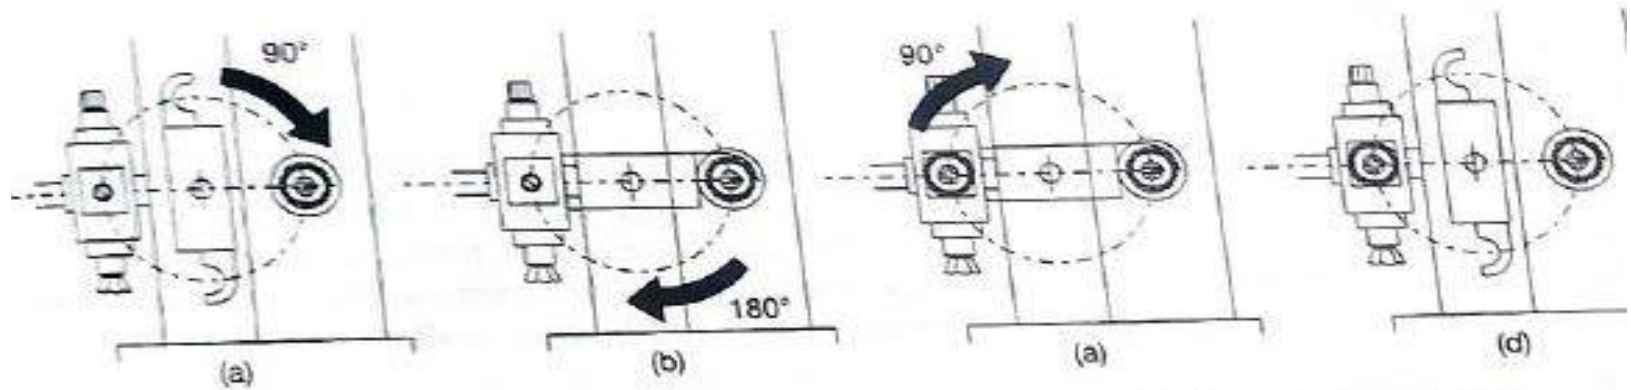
Tool-change procedure with a tool-change arm having a double gripper
